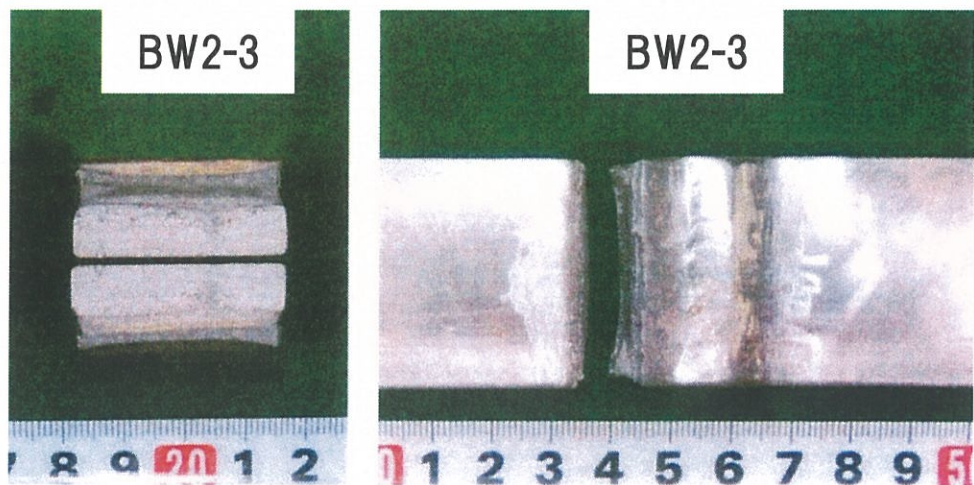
Fracture surface and pass after fatigue test
